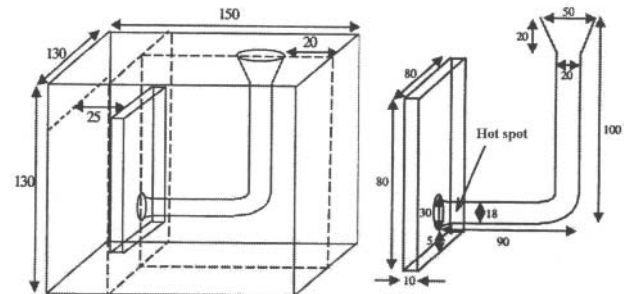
Key dimensions of the assembled “elbow shape” mold in mm, and dimensions of the experimental castings [10].
